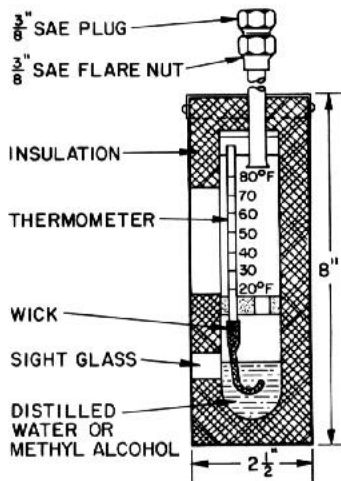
Typical Wet-Bulb Type Vacuum Indicator
